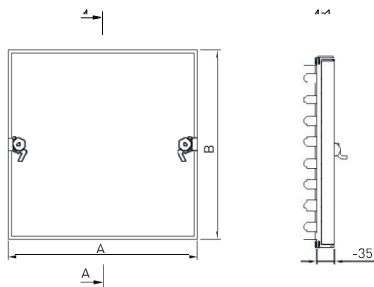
Dimensioning rules of SDS-DR inspection doors.
